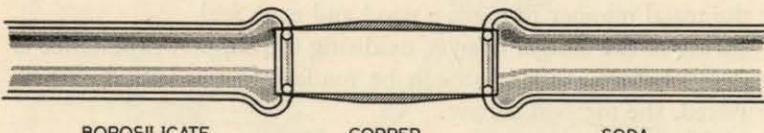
USING A SHORT SECTION OF COPPER TUBE TO MAKE A SODA-TO-BOROSILICATE JOINT
